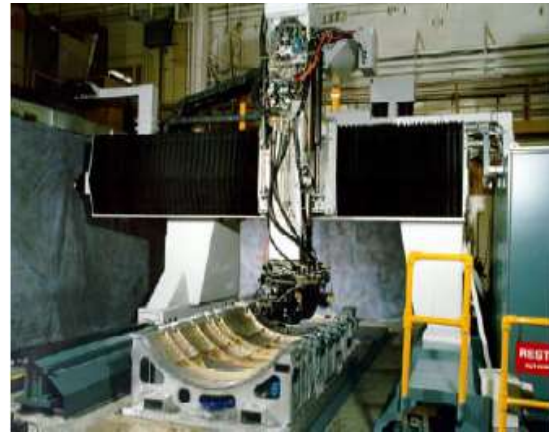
FSW equipment and clamping jigs for reinforced panel manufacturing [23].
